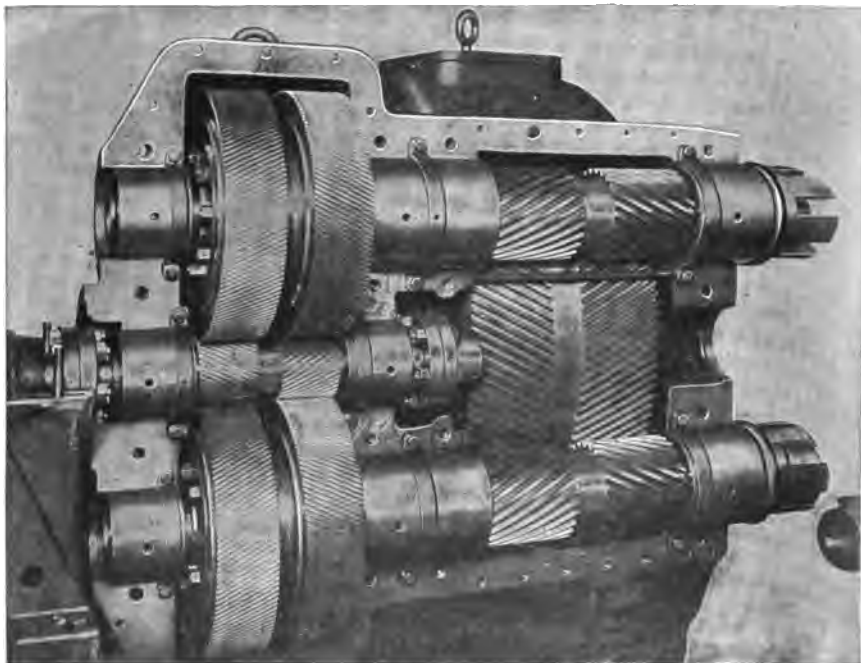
SEC. 3.—1750 horse-power, 3200/137 revolutions per minute, double-reduction gear, made by the General Electric Company.
